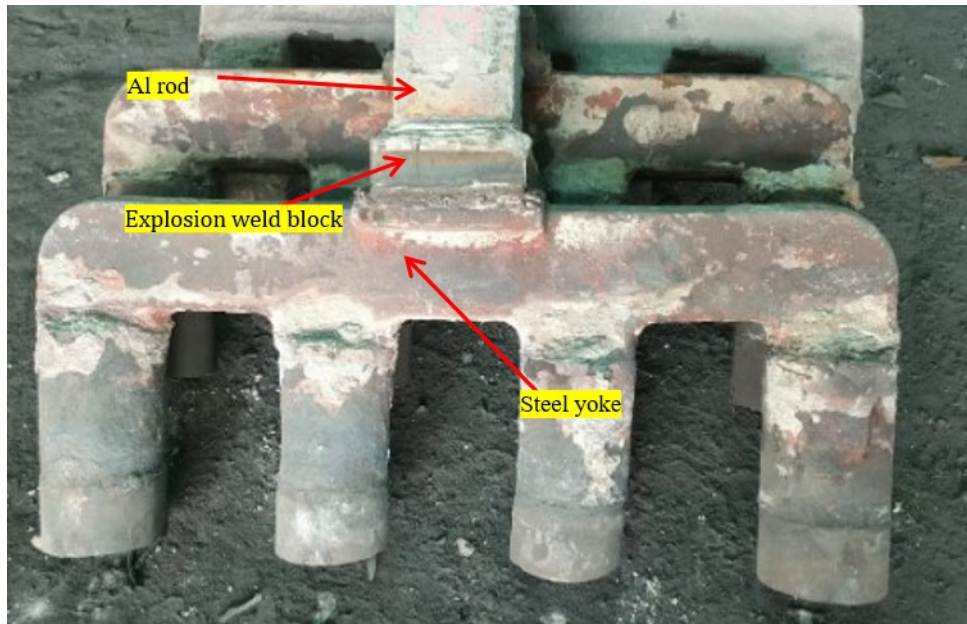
Traditional method—aluminium rod and steel yoke are connected by explosion welding blocks.
